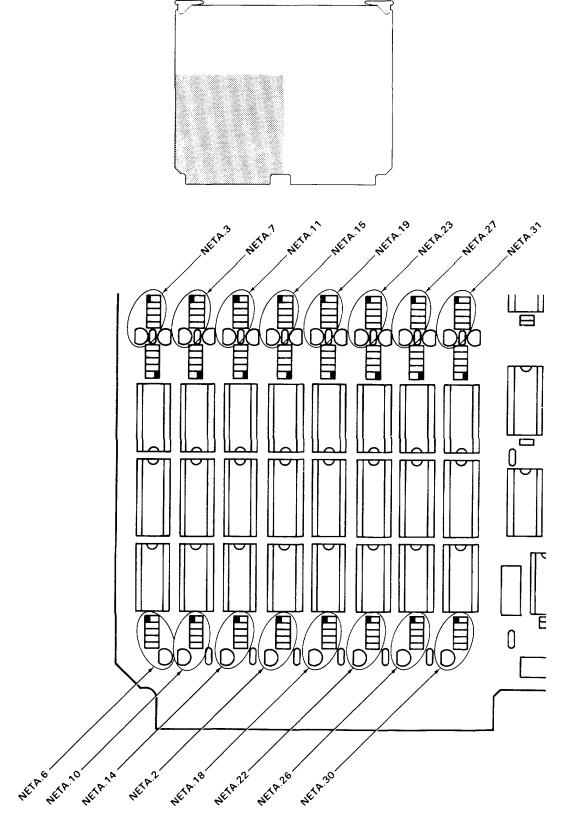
Driver/Sensor Component Layout (Sheet 2 of 4)
